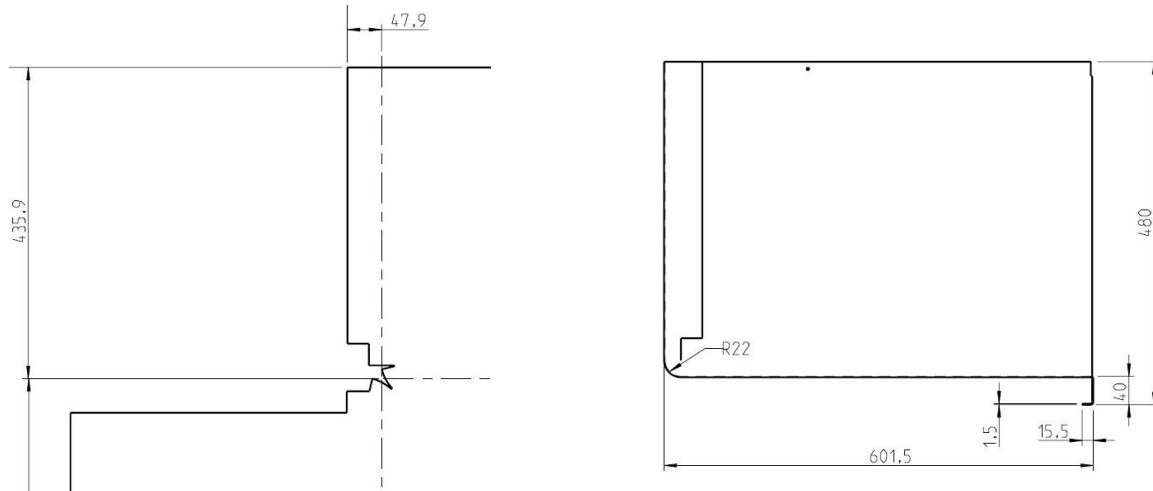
Typical cutting and bending drawing for rounded corner boxes.
